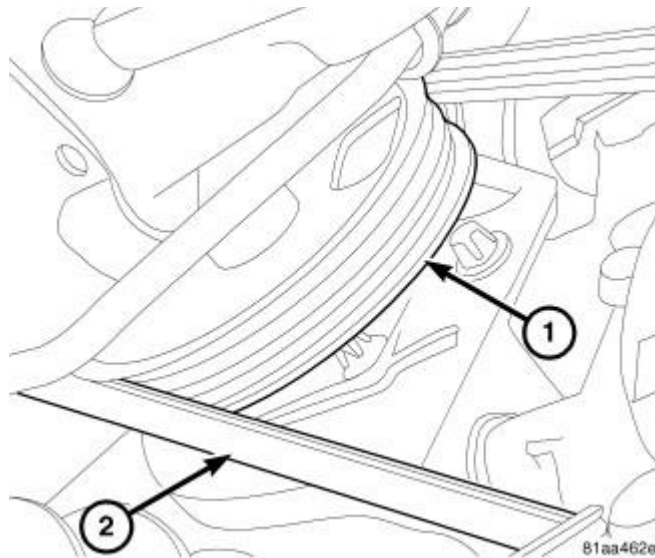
STRETCH TO FIT POWER STEERING BELT REMOVAL
